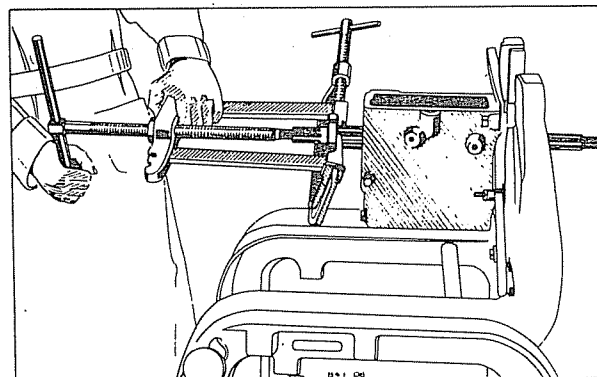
Removing Mainshaft Rear Bearing with Puller C-549.
